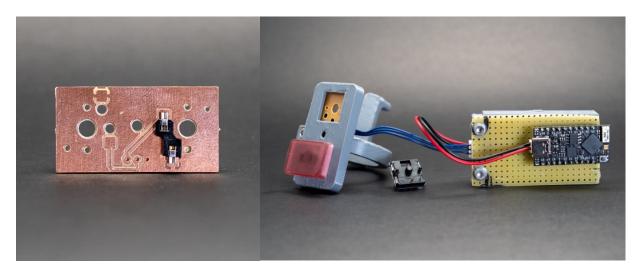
The custom-printed PCB (left) and Gentili-Morin's updated controller (right).
